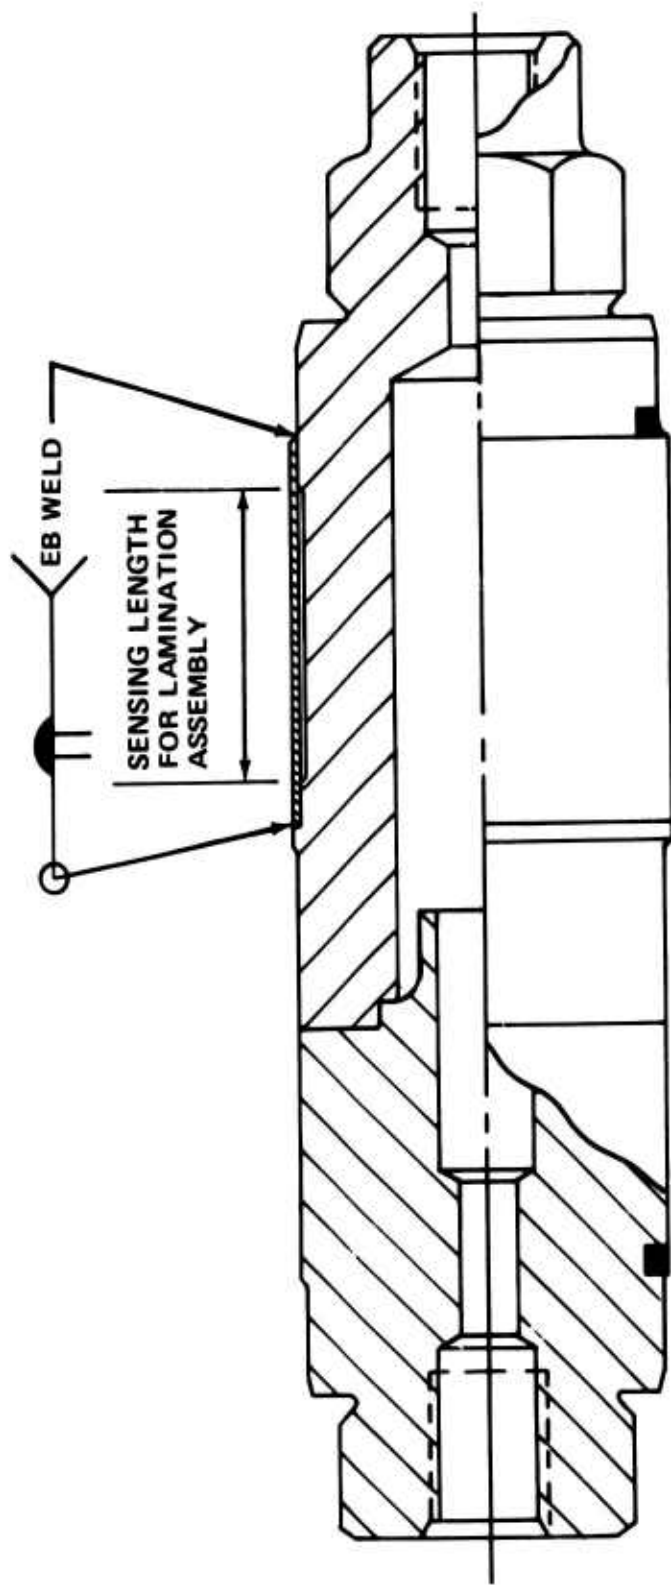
Cross Section of the Sleeved Specimen Shaft.
